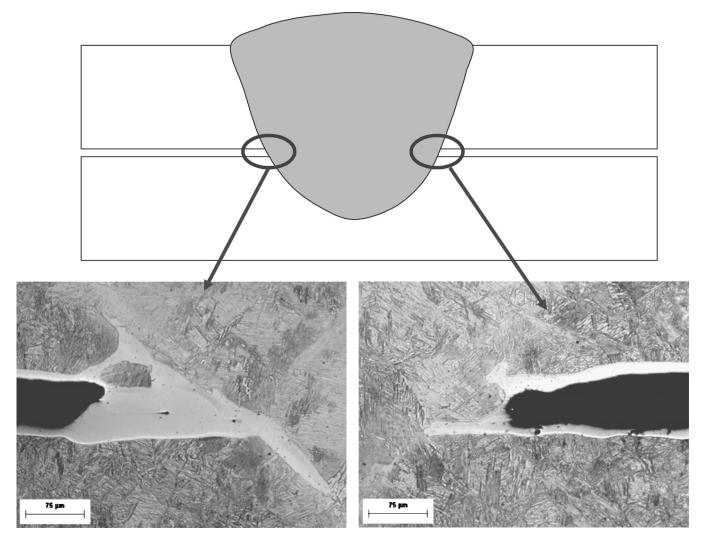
High-magnification views of the crevice—weld fusion zone intersection regions of a diode laser weld made at 0.7 m/min, showing the solidified high-Al liquid films.
